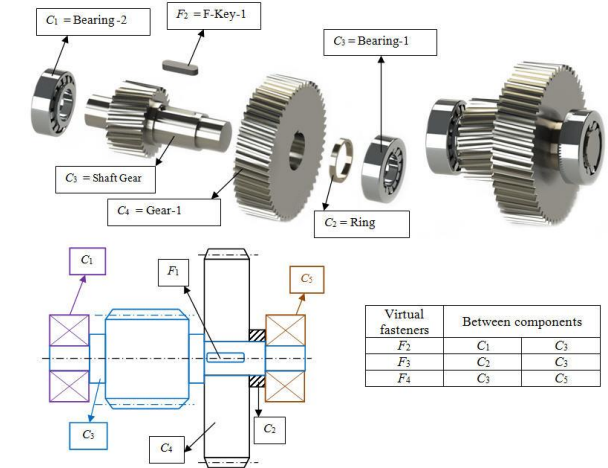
Exploded view, assembly and cross-section view of subassembly shaft with gears.
